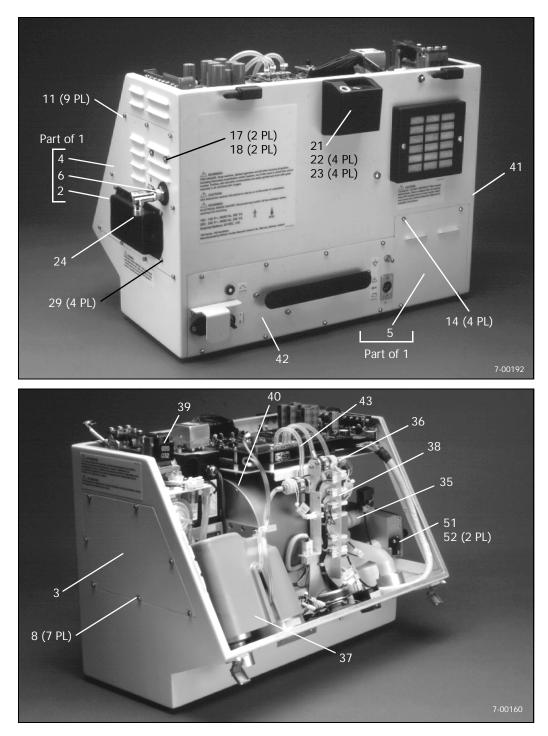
Ventilator head assembly (Sheet 1 of 2)
